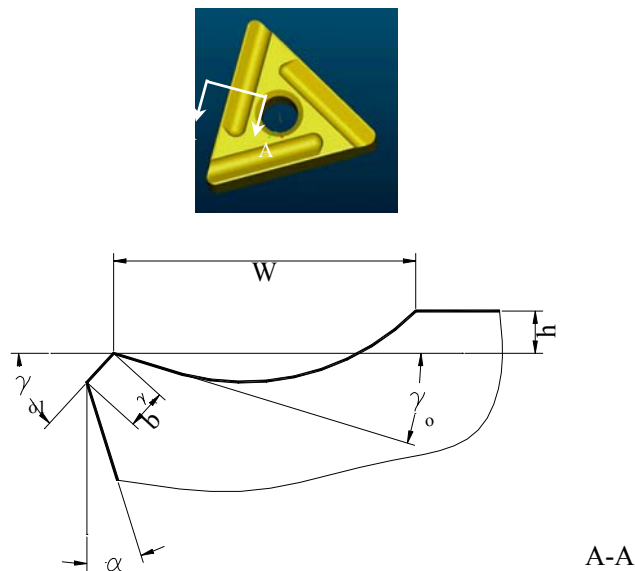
Geometry of Two-Dimensional Grooved Inserts
